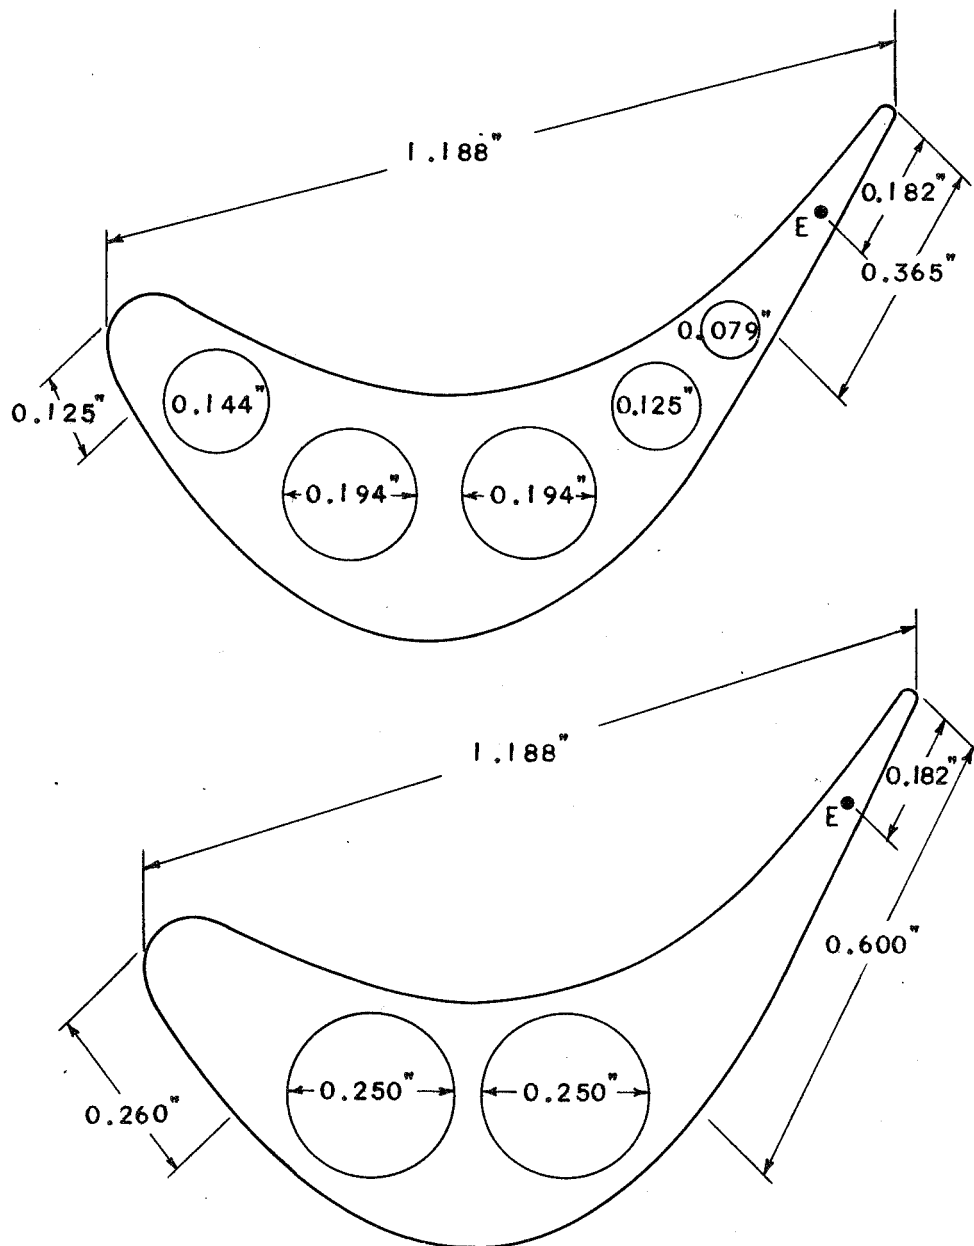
Cross section of water-cooled turbine blades showing location and size of cooling passages and blade dimensions. Turbine blade dimensions: blade span, 4 inches; perimeter of blade heating surface, 3.05 inches; area of blade, 0.29 square inch.
